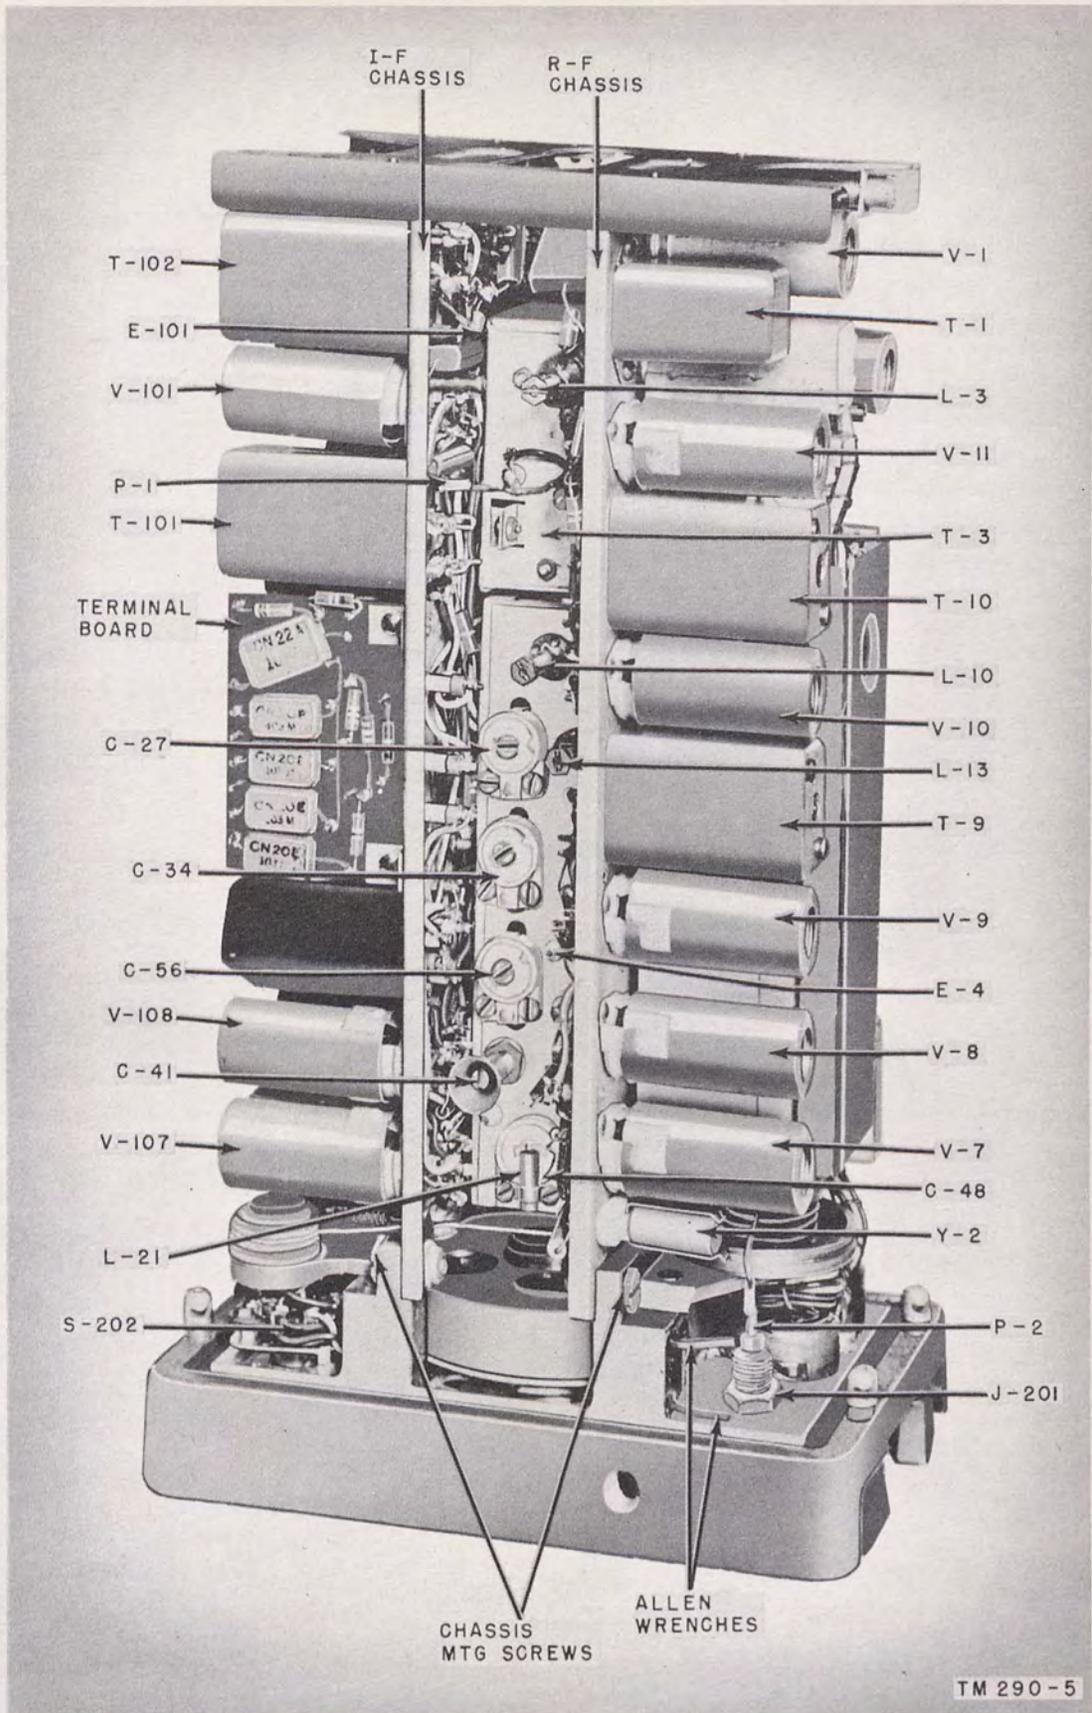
Receiver-Transmitter RT-70/GRC, case removed, top view of panel-and-chassis assembly.
